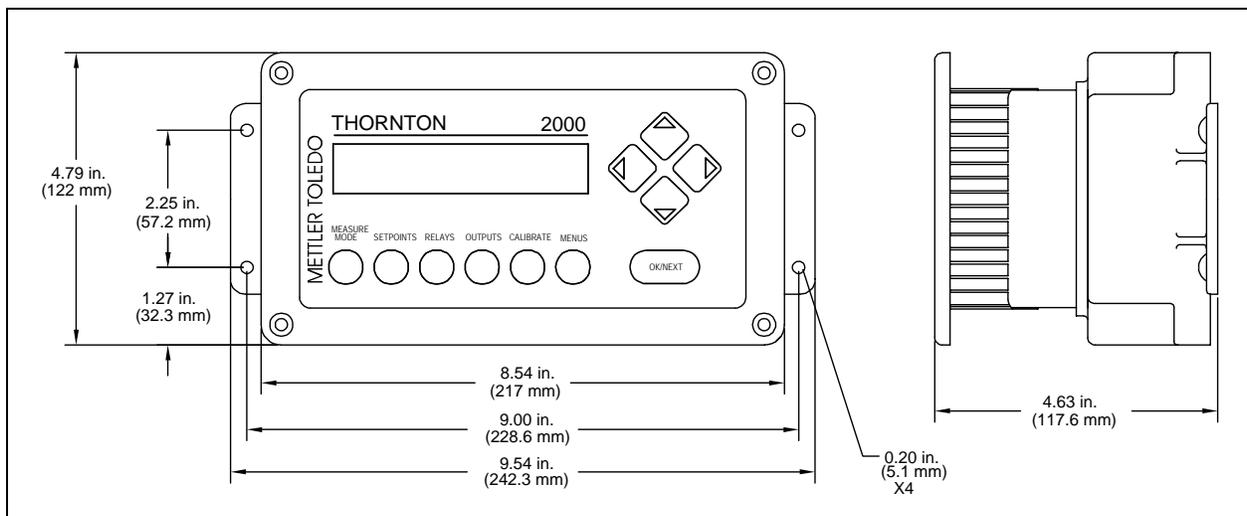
Wall Mounting Dimensions (with accessory back cover installed)
